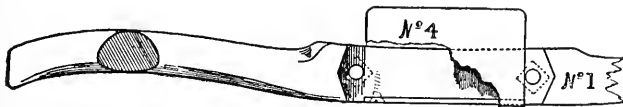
View Showing Half of Stock Dressers' Scraper.
